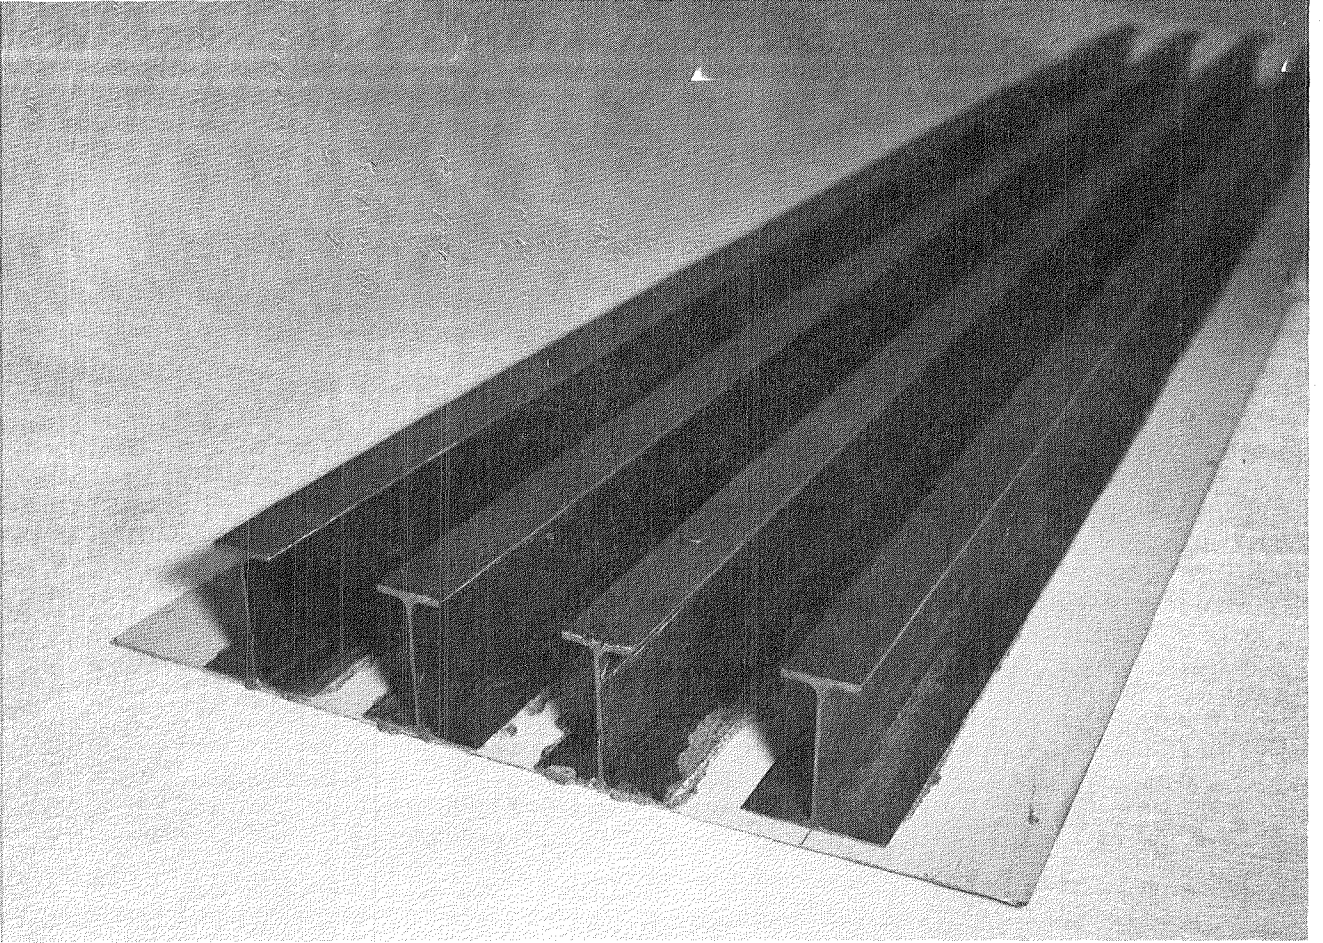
"I" Stringer Stiffened Skin Element in Vacuum Bag Bonding Fixture
